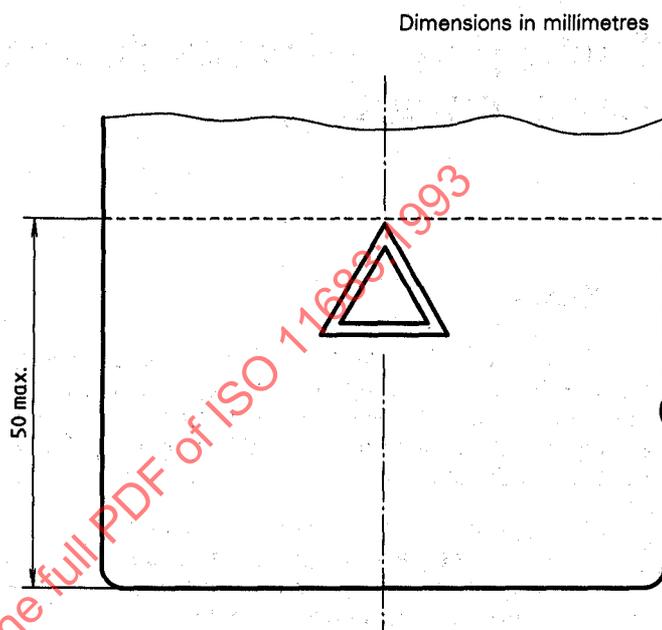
Location of the tactile danger warning symbol on packaging with a bottom
